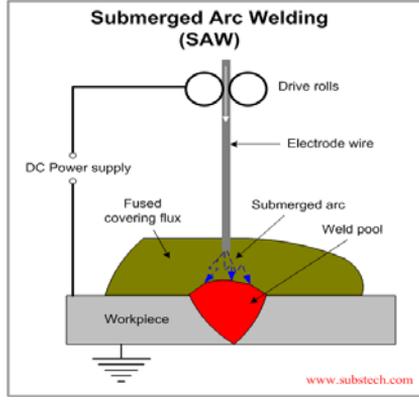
Submerged Arc Welding (SAW) Process
